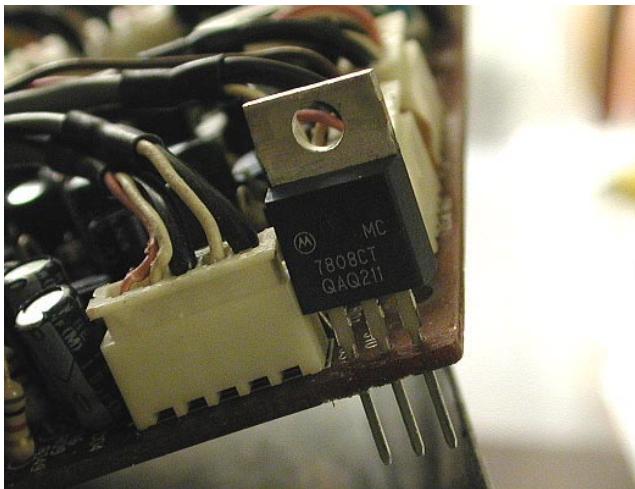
Be sure to insert the 7808 as shown. Because the radio was rotated 180 degrees to get this photo, please make sure that the printing on the plastic part of the regulator faces away from the board. Polarity counts!
